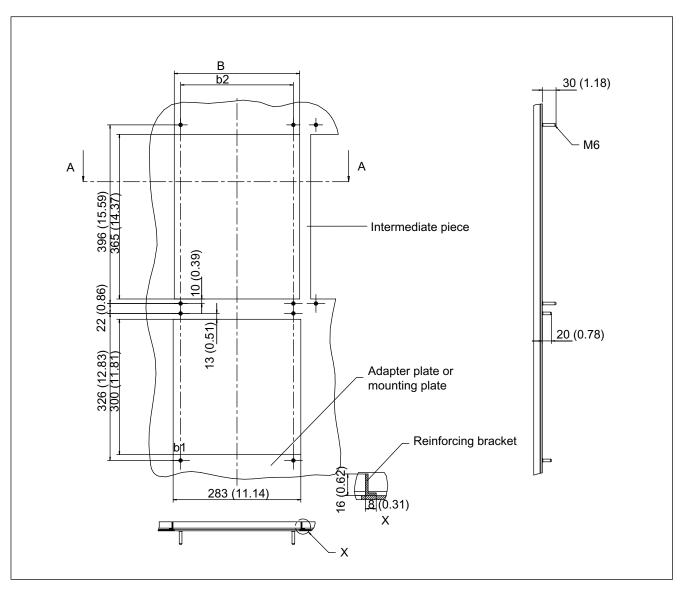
Installation openings for the power unit with external air cooling, 300 mm
